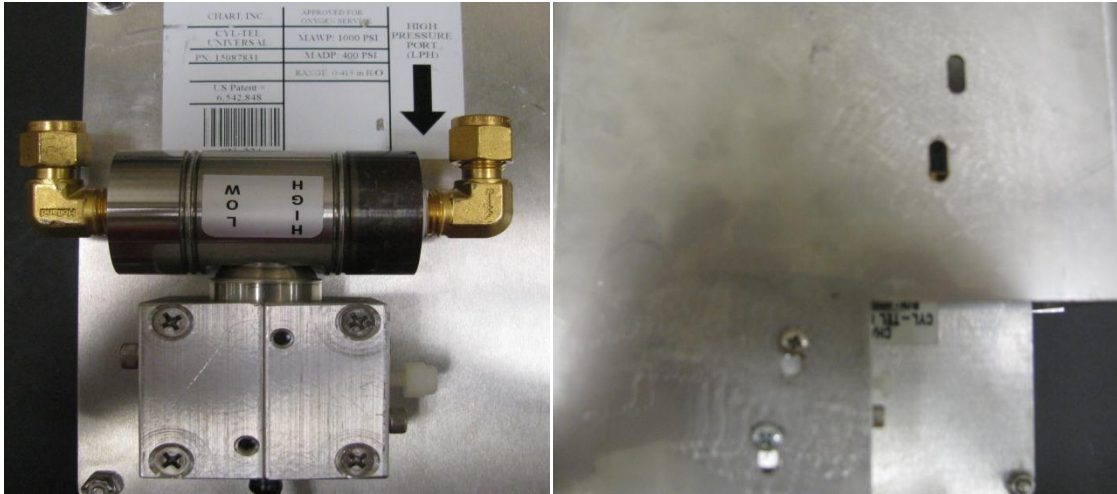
A) Screw holes for mounting bracket on DP sensor block. B) Mounting bracket installed onto the DP sensor block.
